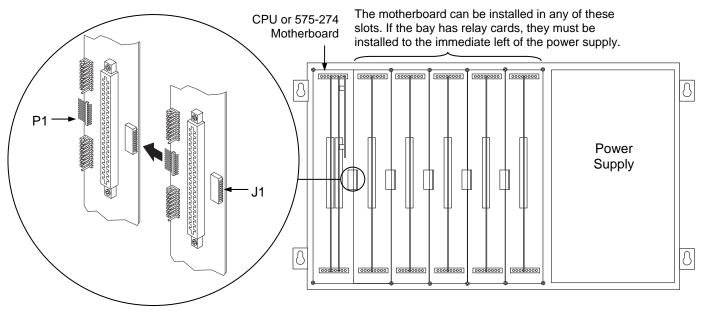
Installing the Motherboard into a 4100 Master Controller Bay
